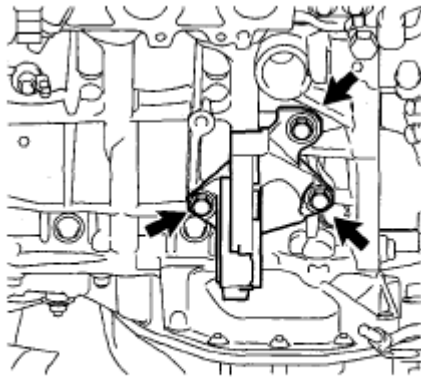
Removing Bolts And Engine Mounting Bracket RR
